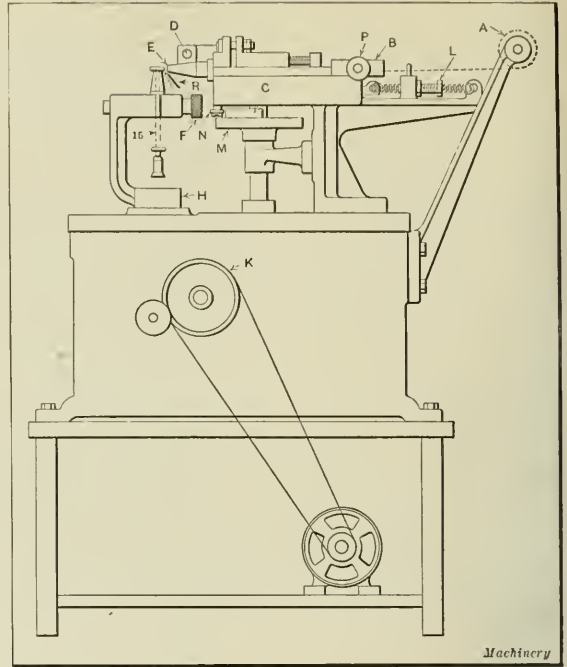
Machine used for inserting Hook End of Nickel Wires
